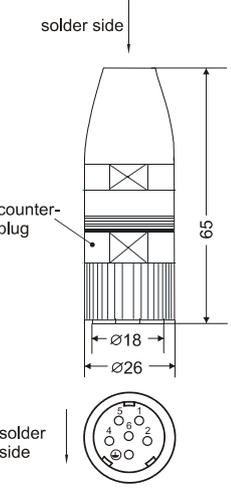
View on the SC series mating connector of the motor (internal thread M23)
